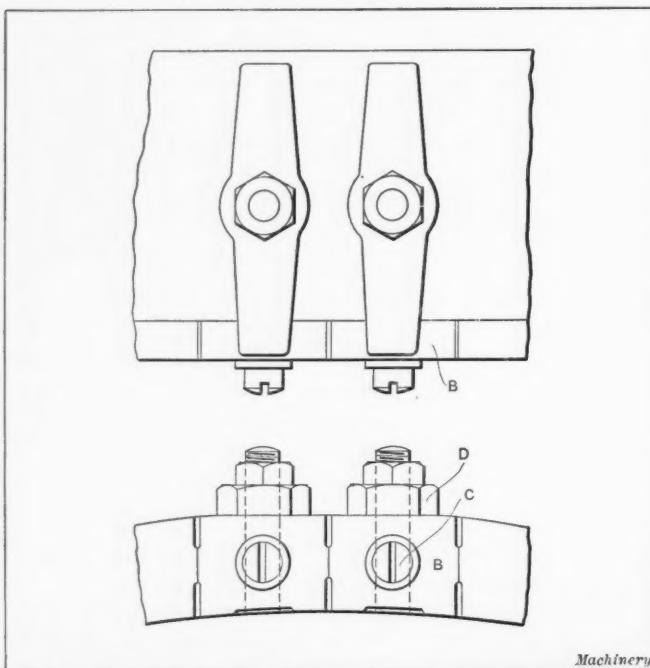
Illustration showing how the Blocks on the Master Dividing Wheel shown in Fig. 6 were made and held in Place
